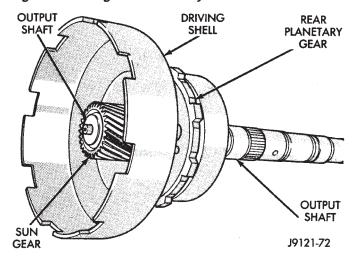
Installing Sun Gear And Driving Shell—46RH
